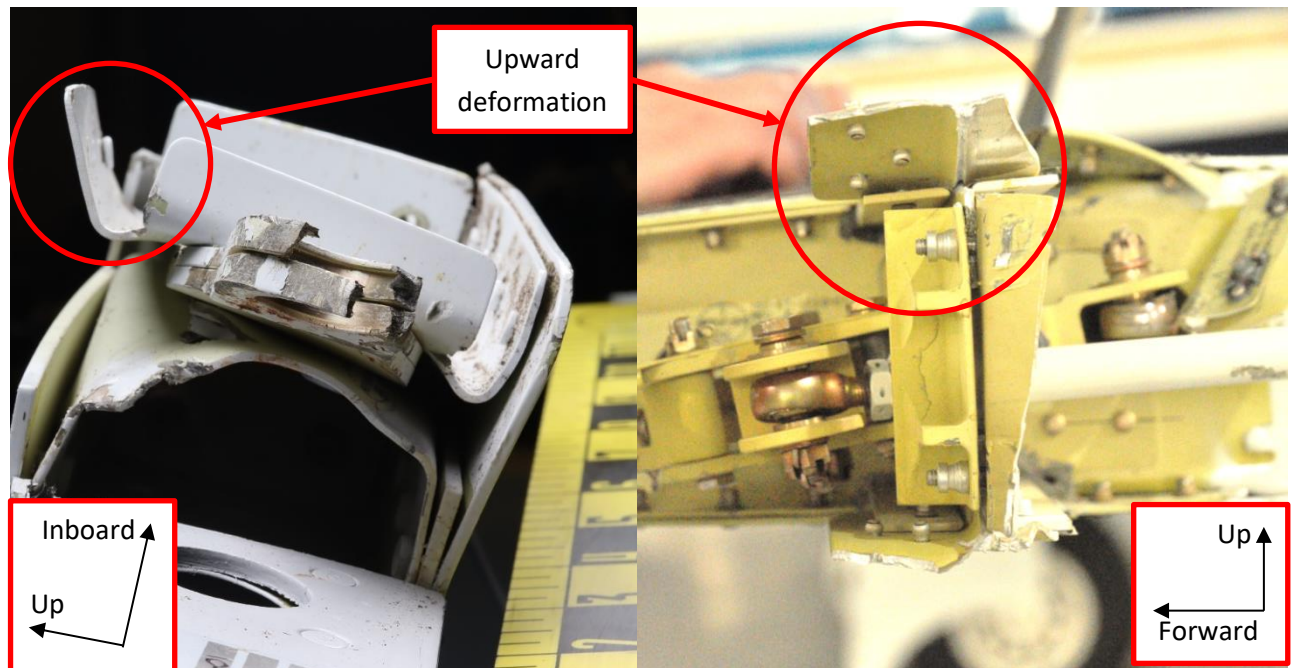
Winglet attachment rib forward view (left), wing extension main inboard view (right)
